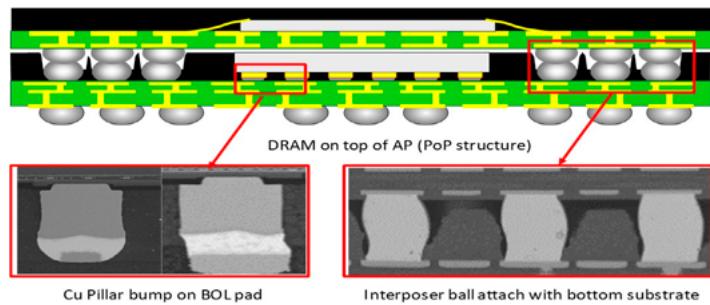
LAB used to attach DRAM with AP. Cross-section data shows very good solder joints.
